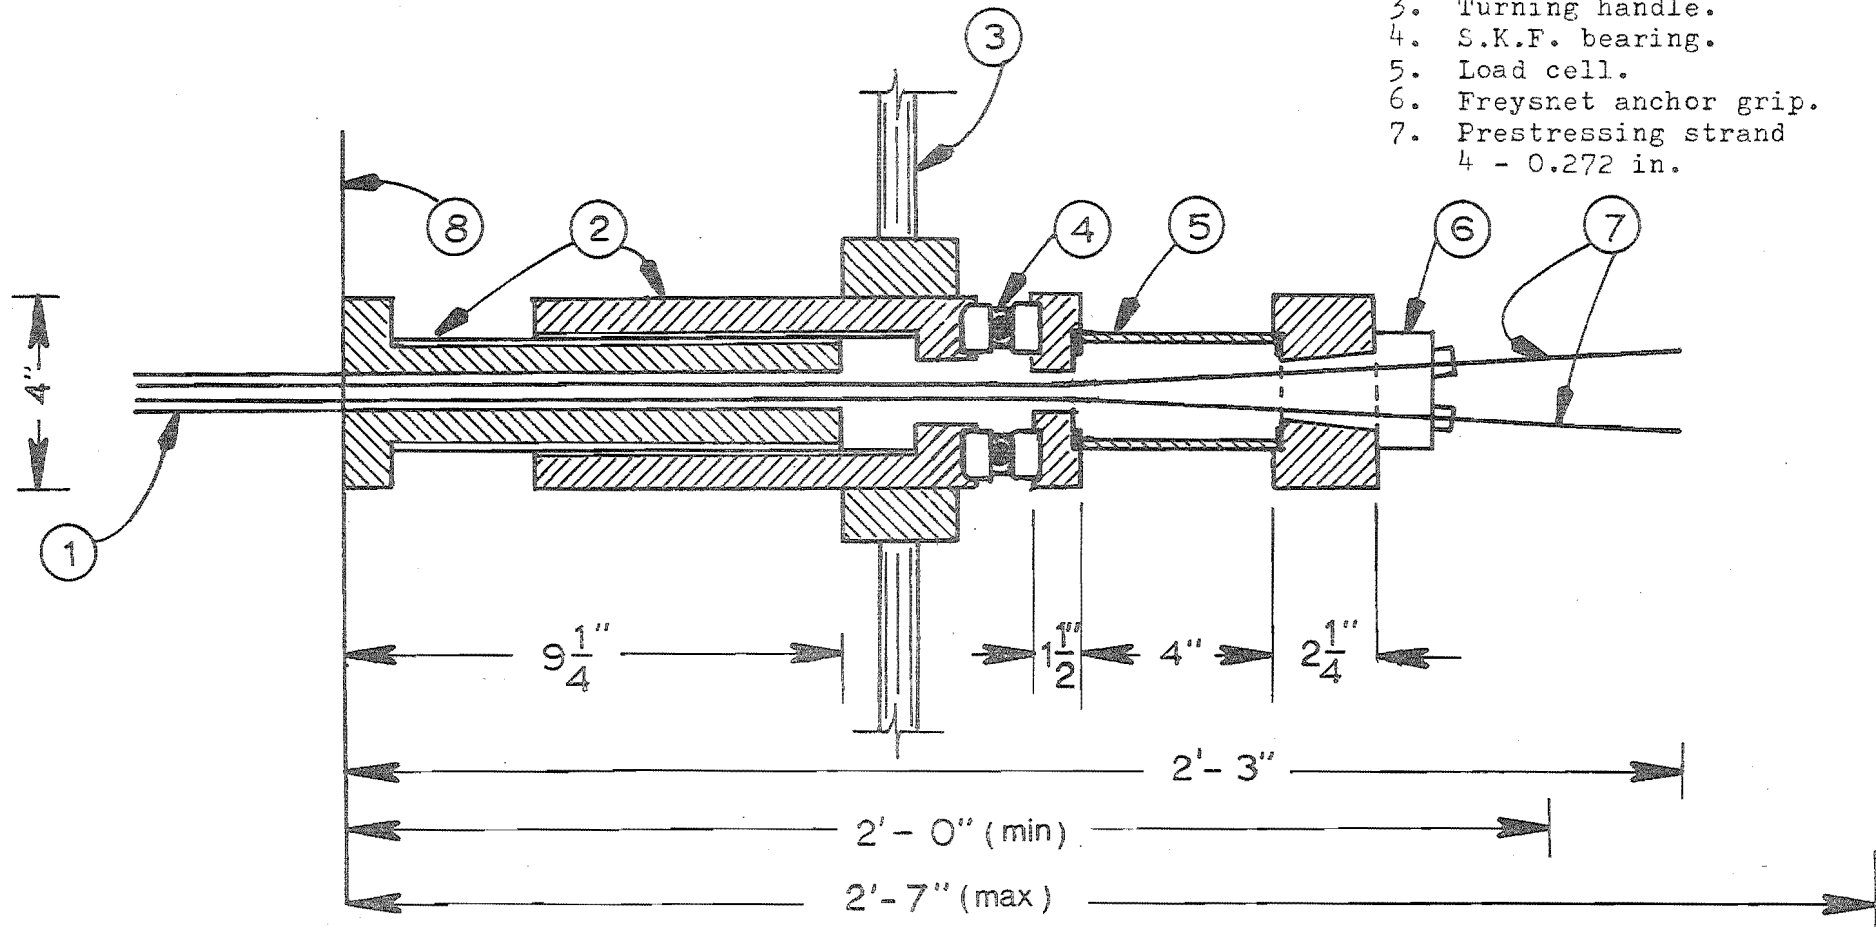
DETAILS OF PRESTRESSING JACK.
